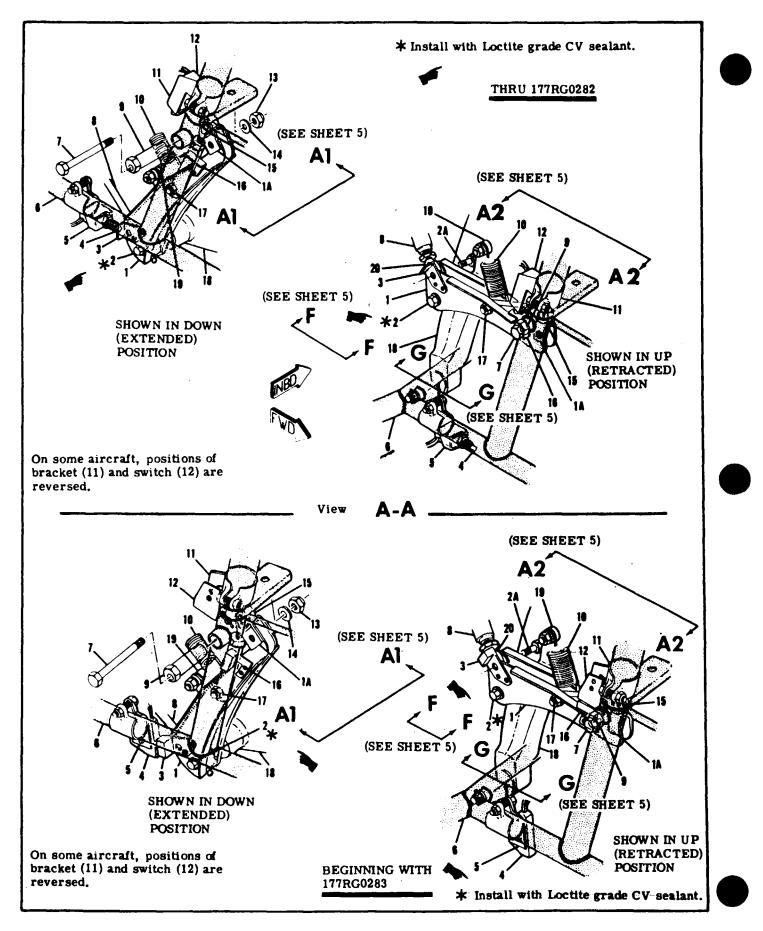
Nose Gear Rigging (Sheet 2 of 7)
